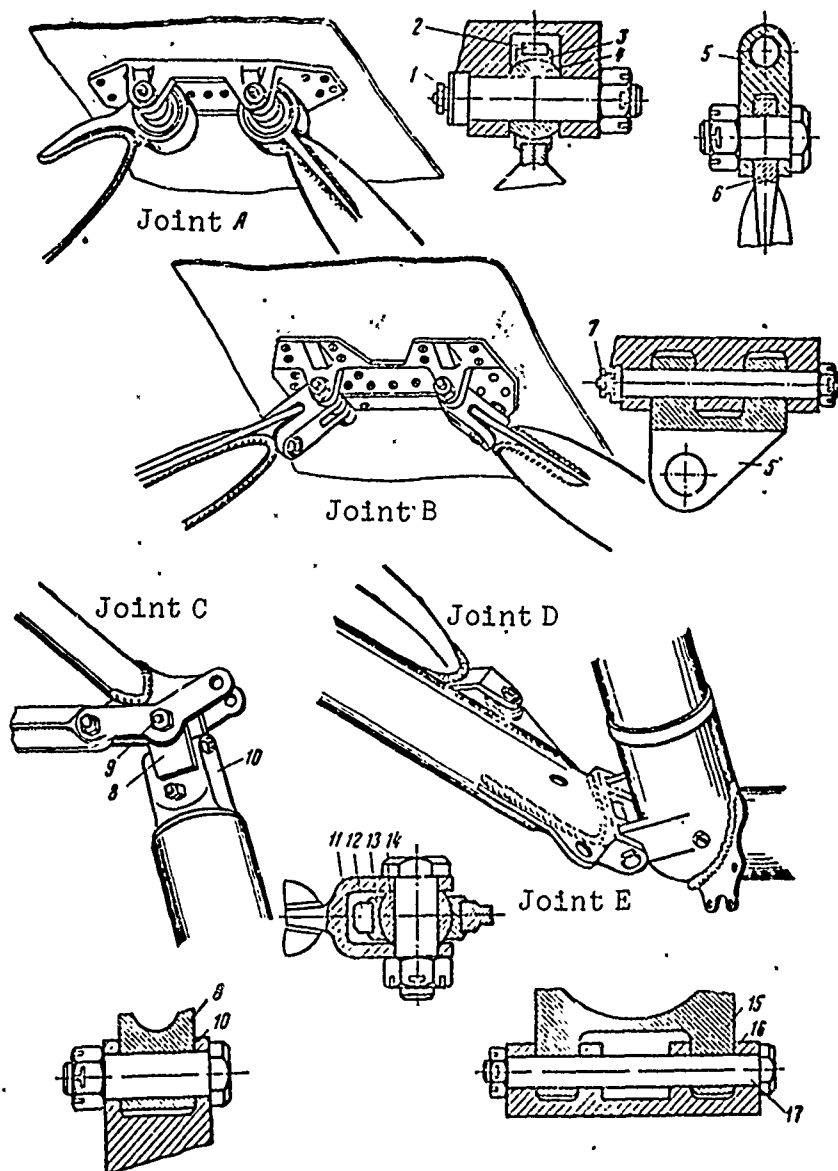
Hinged joints of the landing gear: A - attachment fitting of the forward struts; B - attachment fitting of the rear struts; C - attachment fitting of the shock absorber; D - attachment fitting of the rear strut to the forward strut; E - attachment fitting of the semiaxle to the forward strut: 1 - valve grease cup; 2 - upper eye of strut; 3 - race; 4 - spherical sleeve bearing; 5 - universal joint; 6 - eye of strut; 7 - valve grease cup; 8 - universal joint; 9 - valve grease cup; 10 - shock absorber fork; 11 - rear strut fork; 12 - eye of forward strut; 13 - race; 14 - spherical sleeve bearing; 15 - eyes of semiaxle; 16 - rack of strut; 17 - hollow bolt.
